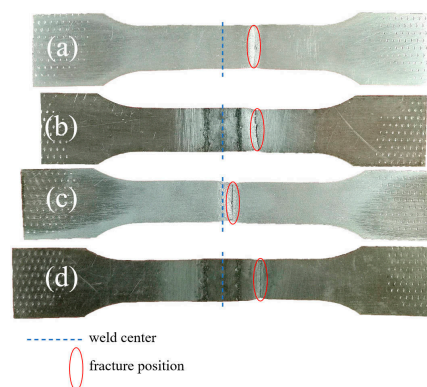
The tensile fracture position of joints: (a) the AW joint; (b) the PWCR joint; (c) the PWSHT joint; and (d) the PWCR-SHT joint.
